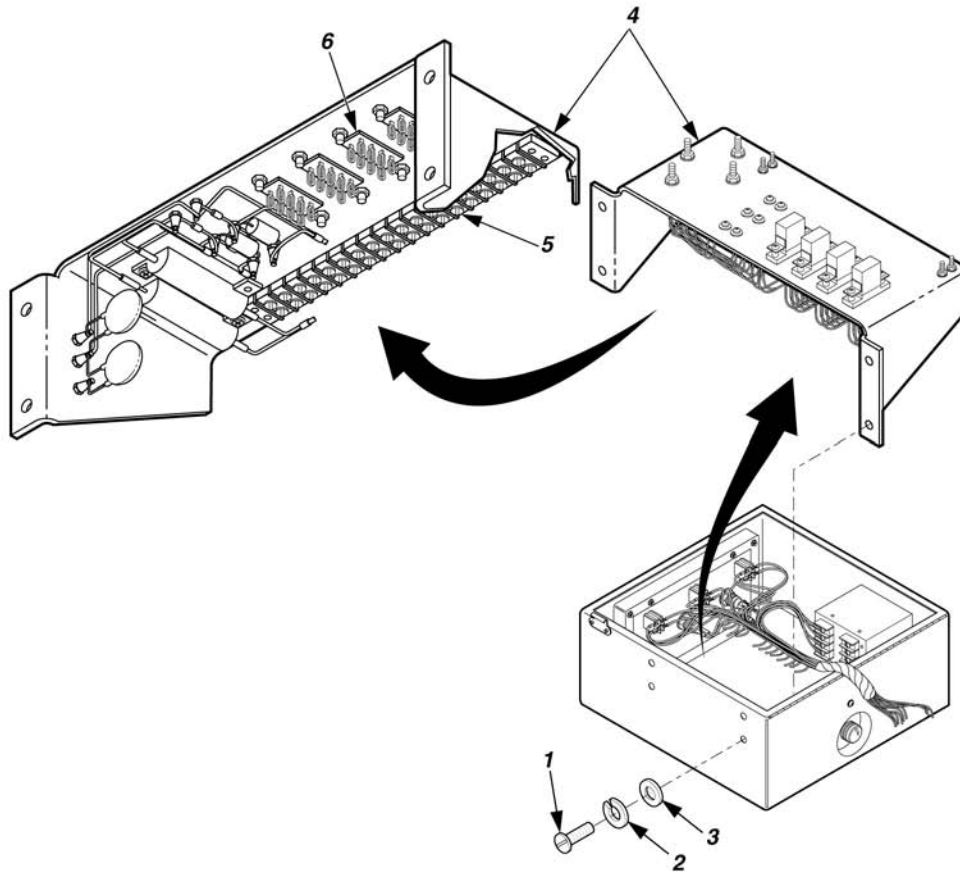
Relay Board Harness Assembly W11 Removal.
